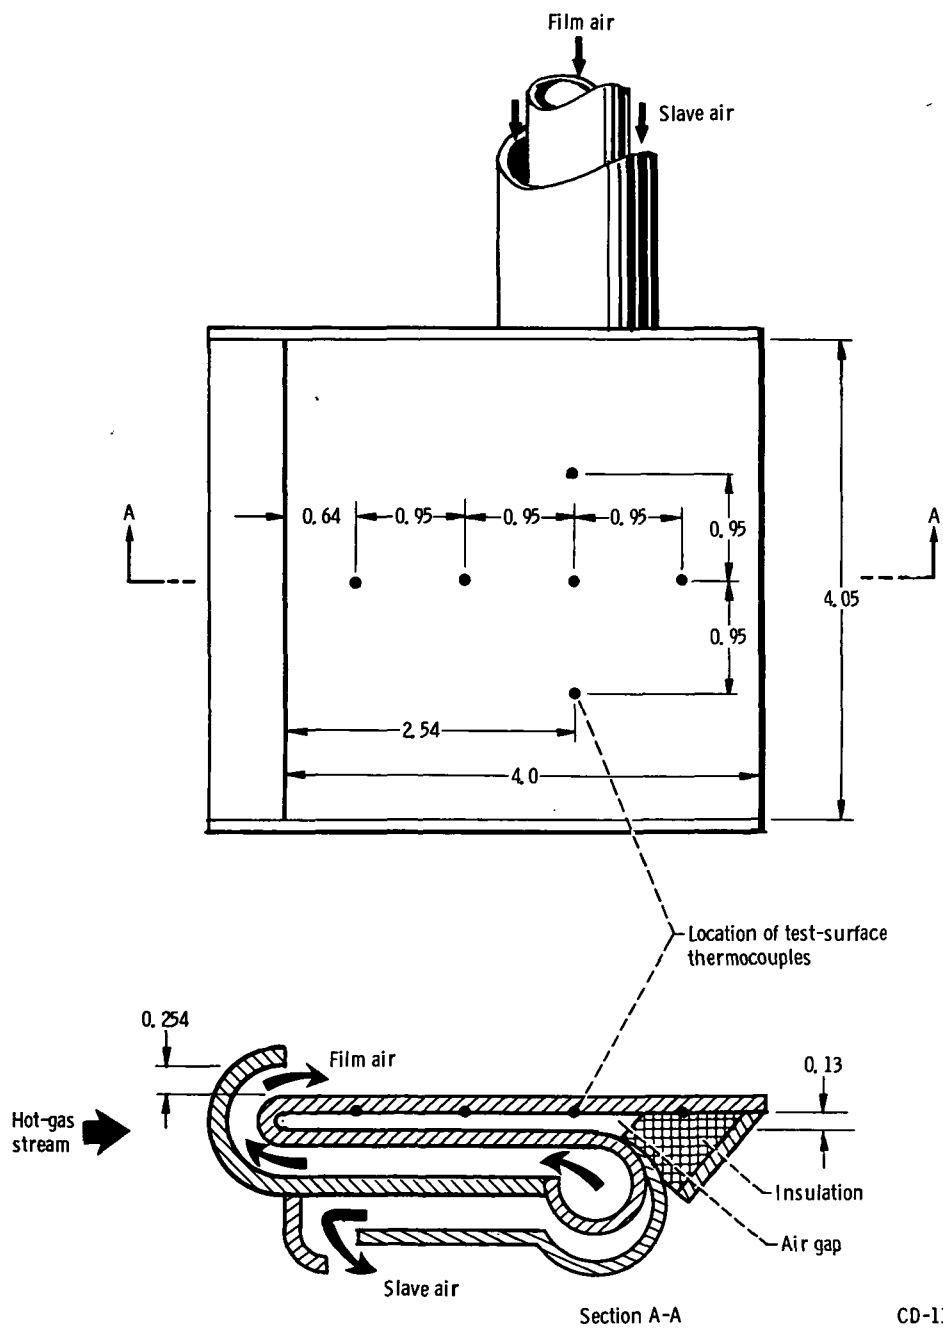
Sketch of film-cooled test section showing location of wall thermocouples. Dimensions are in centimeters.
